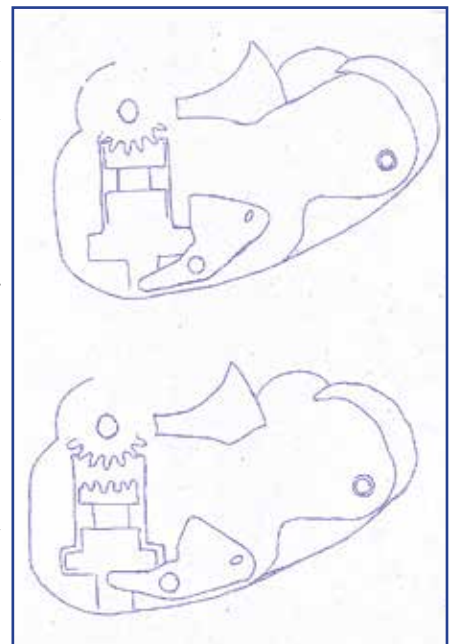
Upper: hand setting position; lower: winding position, drawn in the profile projector.
